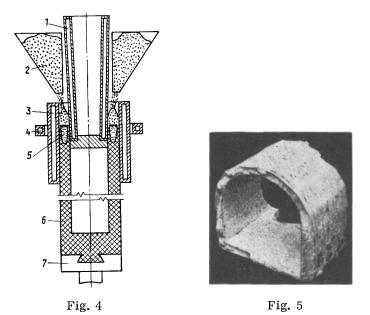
Layout of IMCC equipment for melting pipeline blanks: 1) tapered core; 2) bunker with batch; 3) cold crucible; 4) inductor; 5) melt in gap; 6) pipelike blank; 7) dummy.
